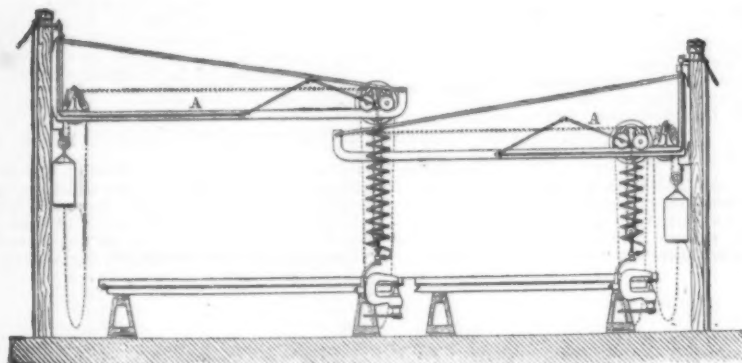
ARRANGEMENT FOR RIVETING SHIPS' FRAMES.
